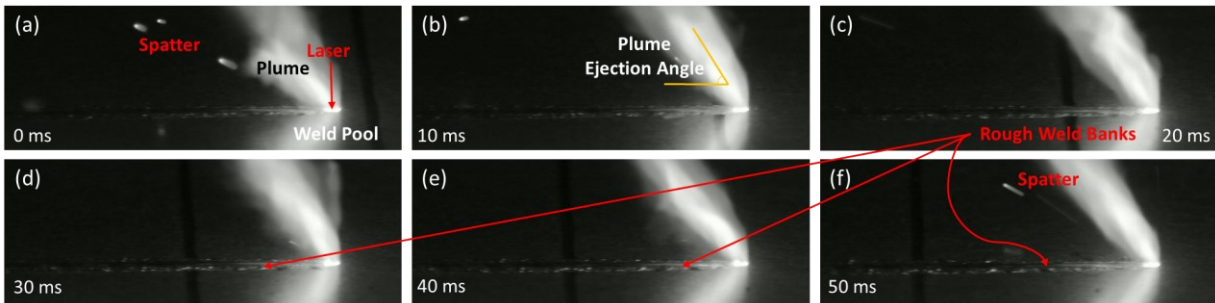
Still images of the welding process in the PBC showing rough weld banks indicative of molten material being pushed out of the weld pool leading to observable undercut and elevated weld banks. The plume ejection angle was clearly visible which is known to get smaller as the welding speed increases which causes humping to be observed on the weld surface.
